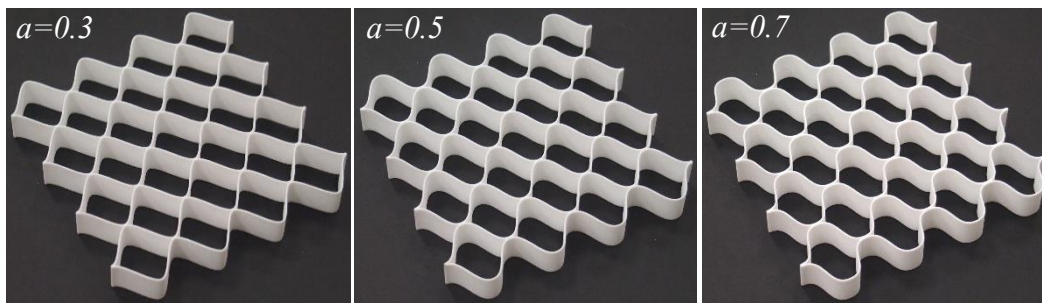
3D Printed spline honeycomb specimens with shape parameter $a=0.3$, 0.5 and 0.7 from left to right.
